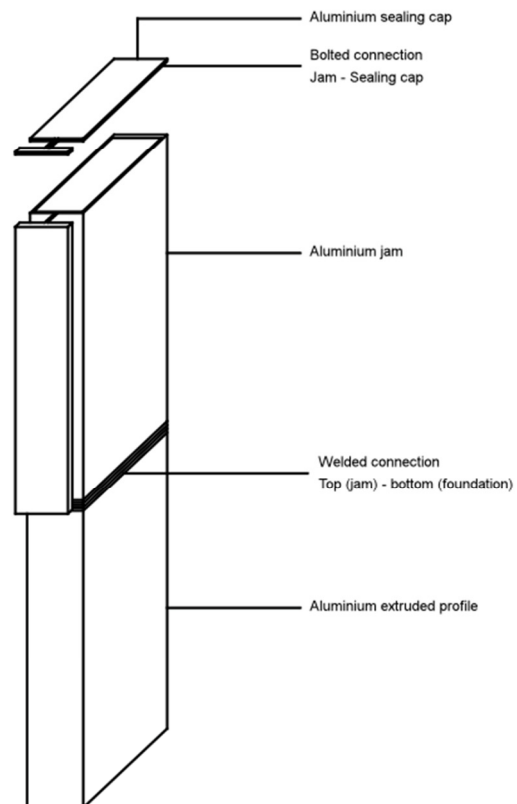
Design 3, Aluminium top + Aluminium bottom element
